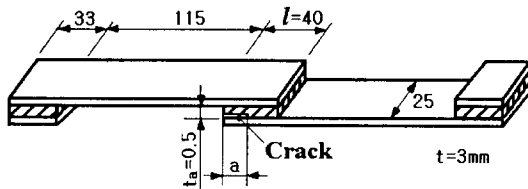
Aluminum bonded single lap-joint specimen with the interface edge crack.
